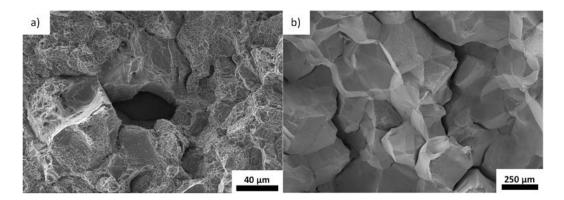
Pictures showing fracture surfaces from the impact tested samples, a) AISI 304 and b) Sanicro 28, both materials have been aged at  $650^{\circ}$ C for 3000h.
